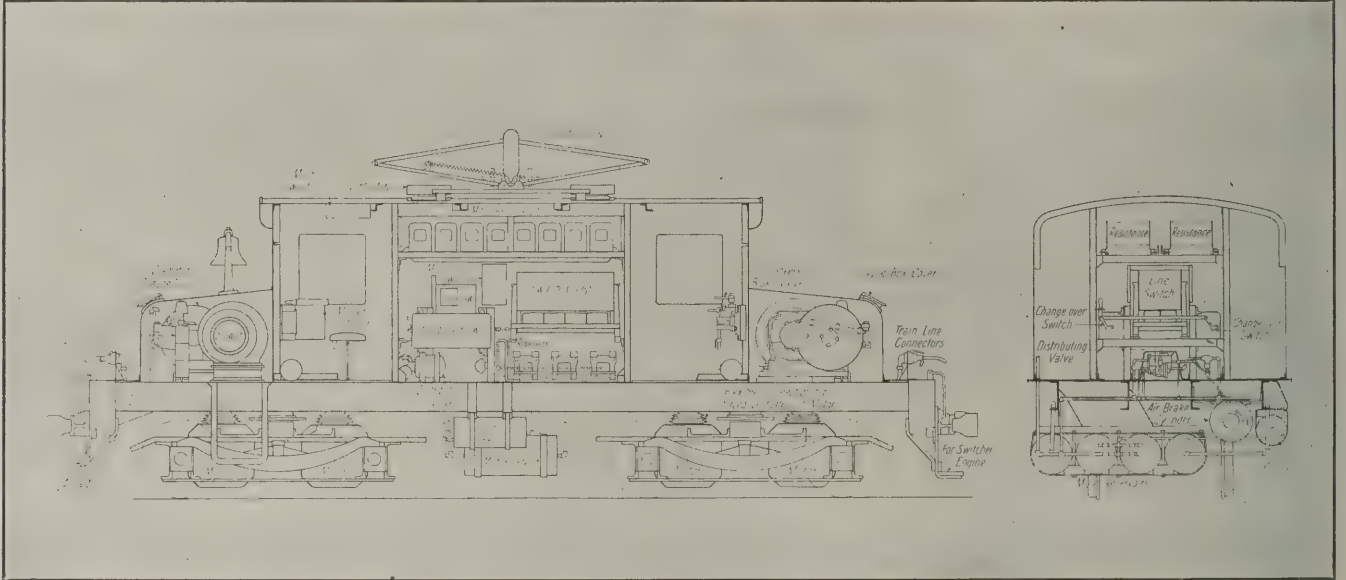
Longitudinal and End Sectional Views showing Arrangement of Equipment
